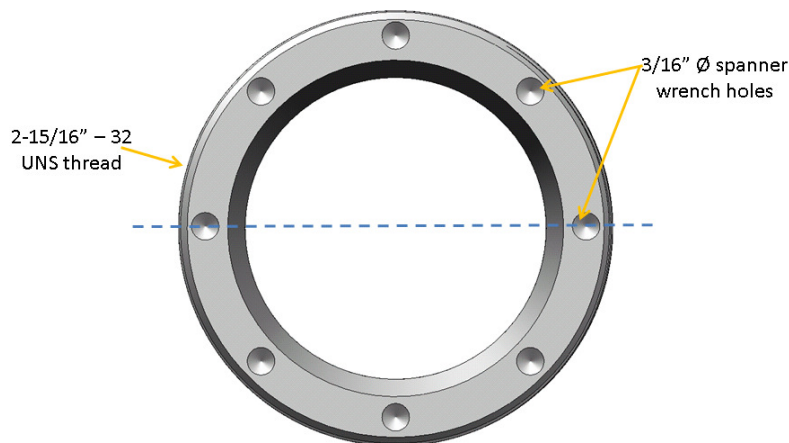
A top view of 10223-DT-422 is shown [24].
